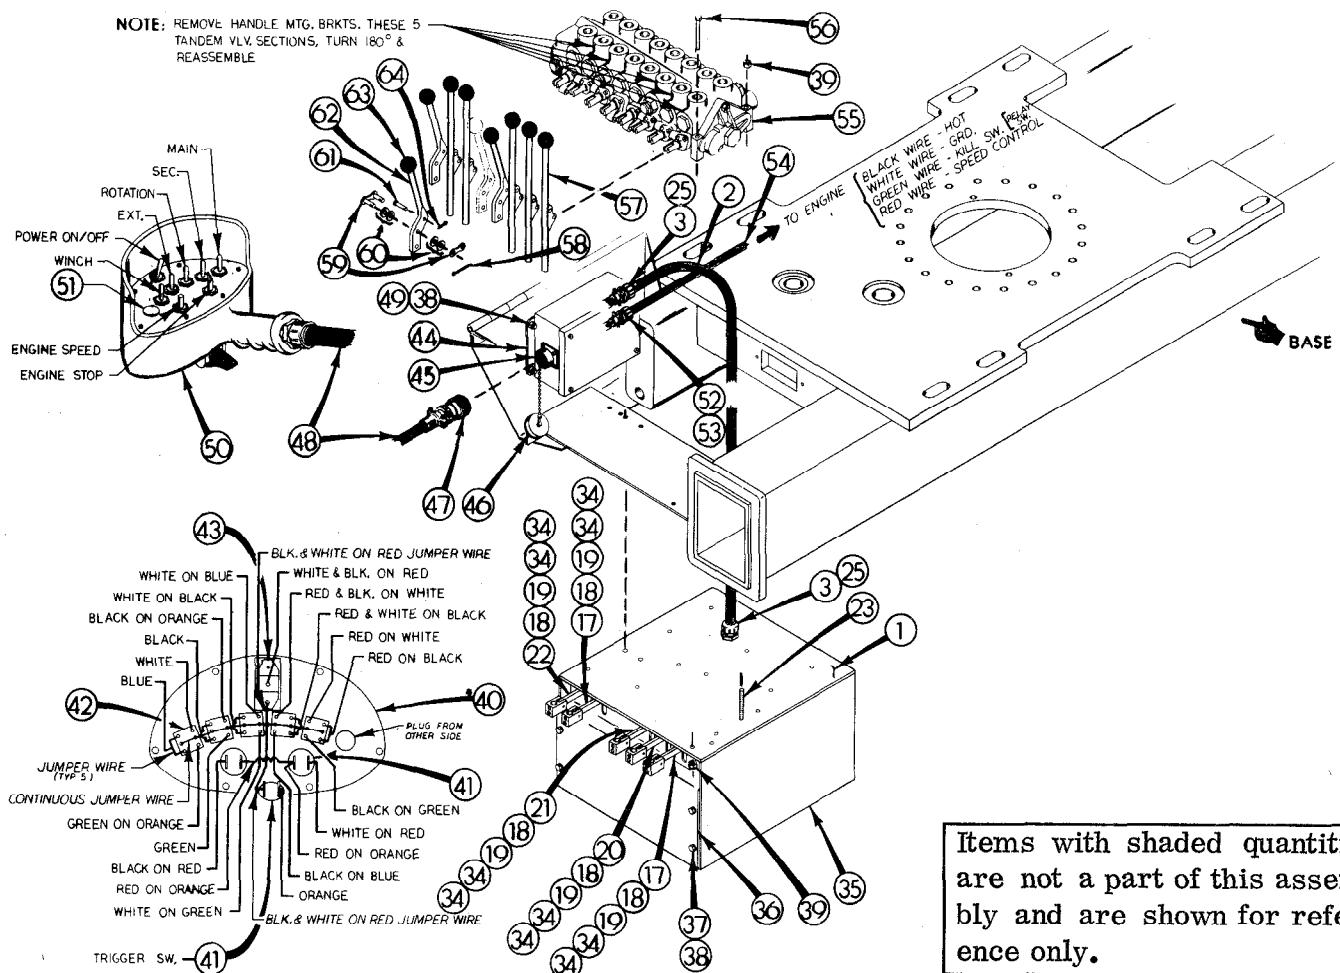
Remote Control with Power-Out Outriggers and Winch – Sheet 2 of 2
